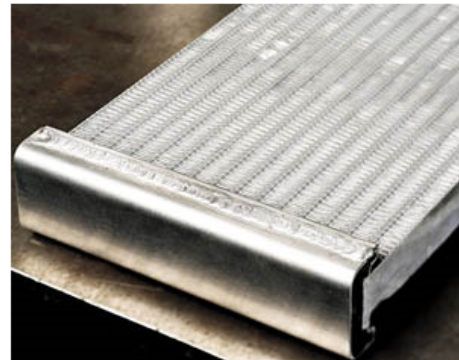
Gas tungsten arc welding creates precise weld beads.
